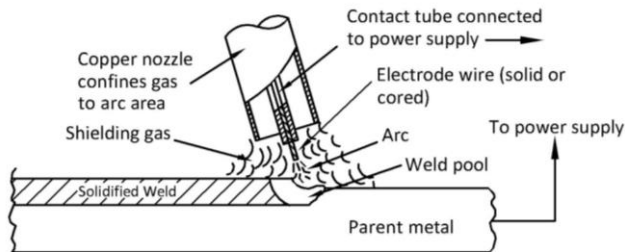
Gas Metal Arc Welding (GMAW)
